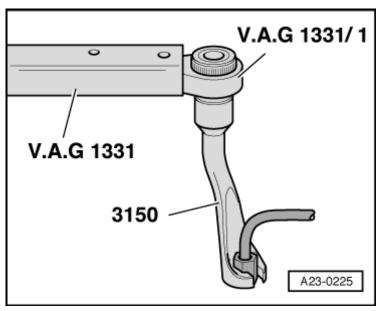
Identifying High-Pressure Line (14 mm) At High Pressure Pump, Torque Wrench V.A.G 1331
